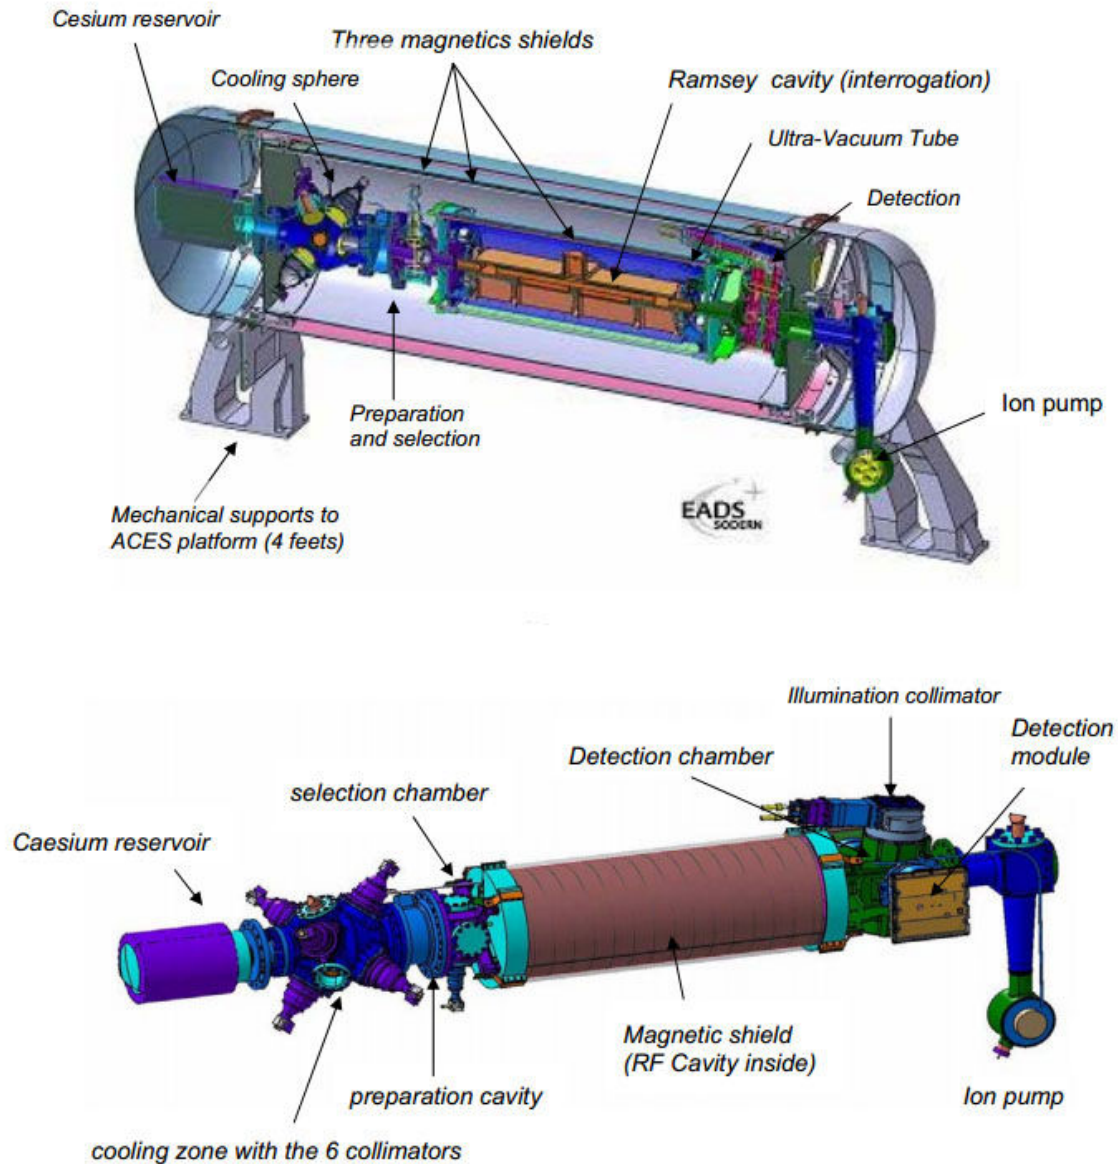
Layout of the cesium tube (up) and the vacuum tube (down). The components will be explained in the following sections.
